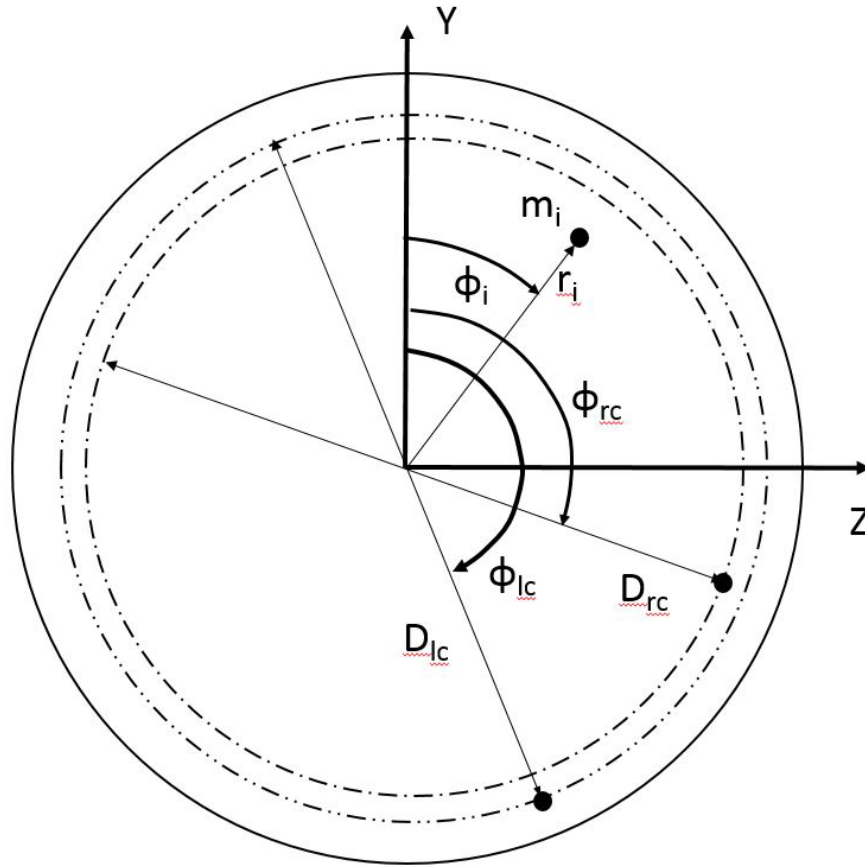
Cross-sectional view of spin-balance machine setup viewed from left side of fixture
